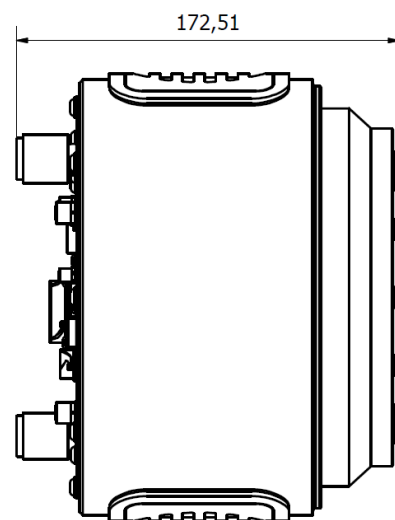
CAD mechanical drawing presenting camera dimensions, side view.
